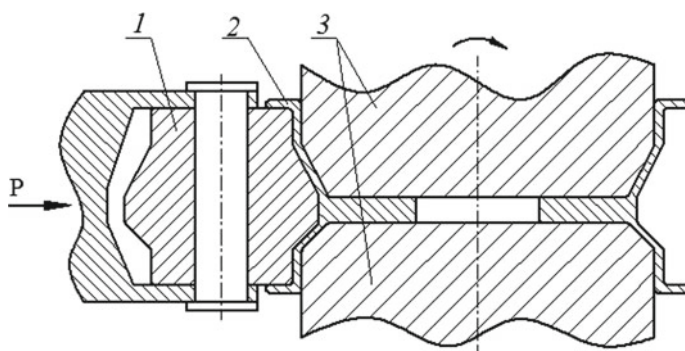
Burnishing a thin-walled workpiece with rollers: 1–workpiece; 2–insert; 3–roller
